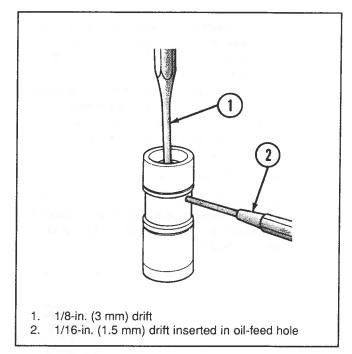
Preparing to Install Metering Valve And Push-Rod Seat
